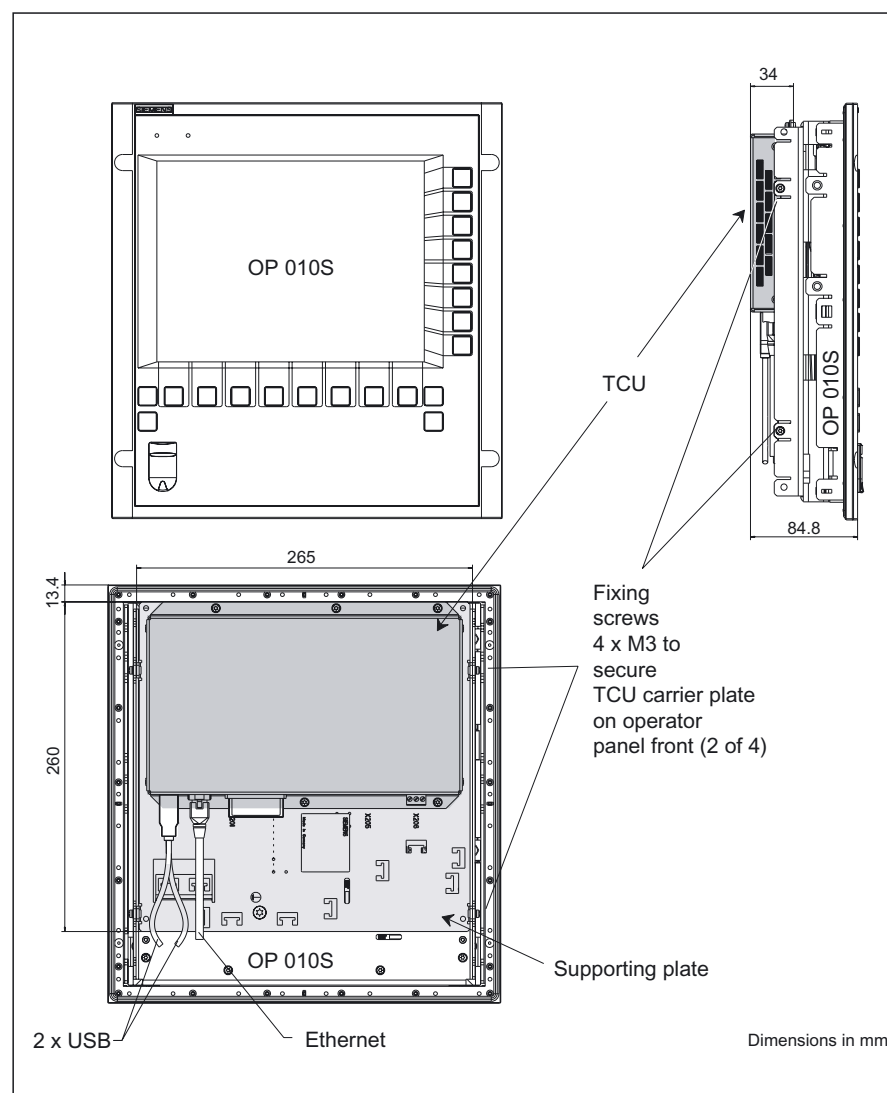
Mounted TCU with OP 010S, front, side and rear view
